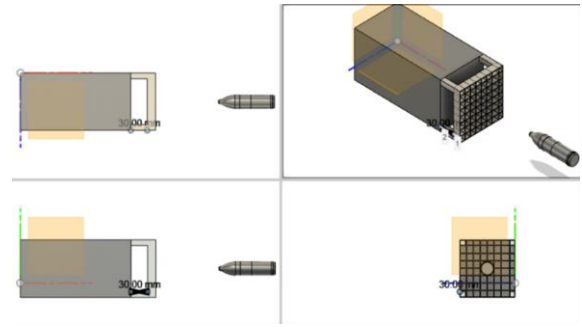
Technical drawing of the cage armor, ammunition, and main armor for test design.
